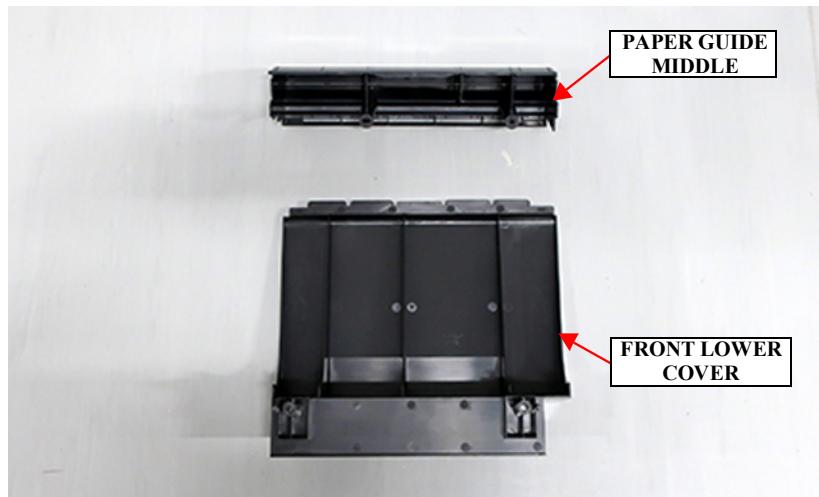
Removing the PAPER GUIDE MIDDLE / FRONT LOWER COVER (3)
